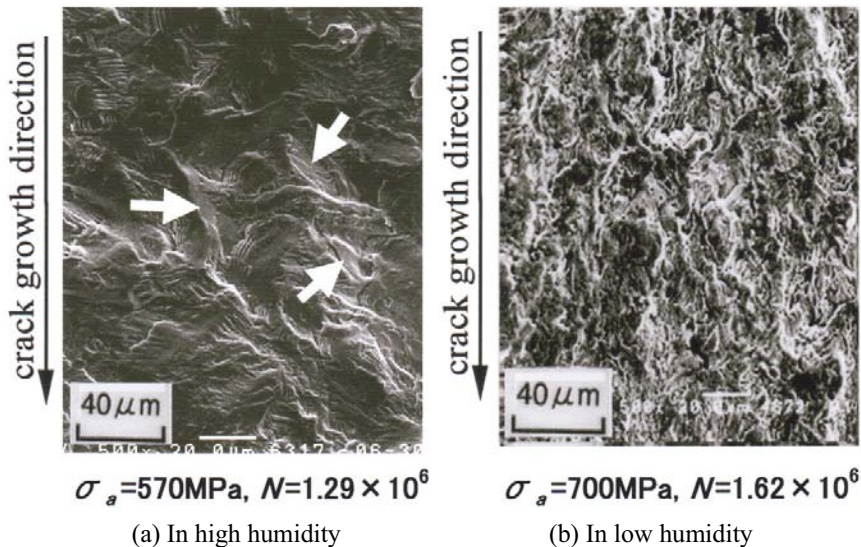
Fracture surfaces of electro-polished specimen (HV670).
